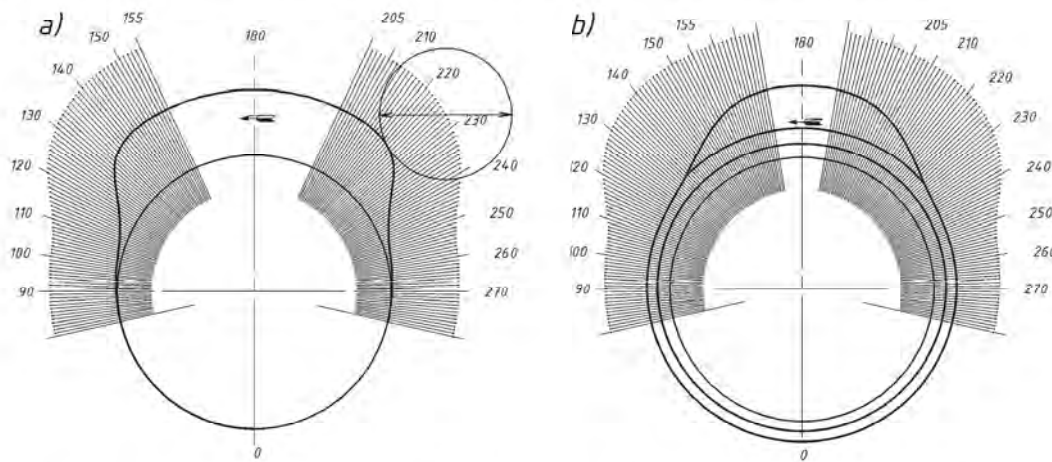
Profiles of valve drive cams: *a* – exhaust valve of a two-stroke LSE; *b* – four-stroke MSE (adapted from [14, 19])
